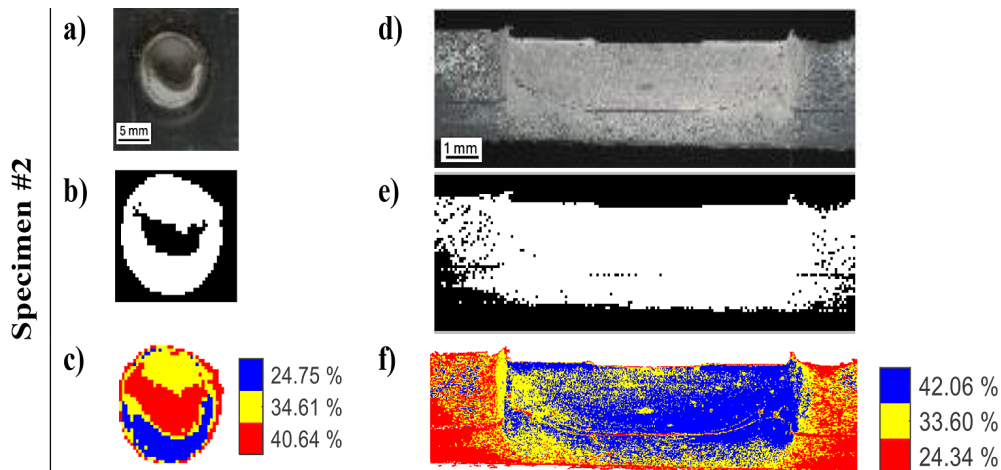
Inspection of the weld of specimen #2: (a) top view-photo, (b) top view-binary segmentation, (c) top view-three-color segmentation, (d) cross-section-photo, (e) cross-section-binary segmentation, (f) cross-section transverse - three-color segmentation.
